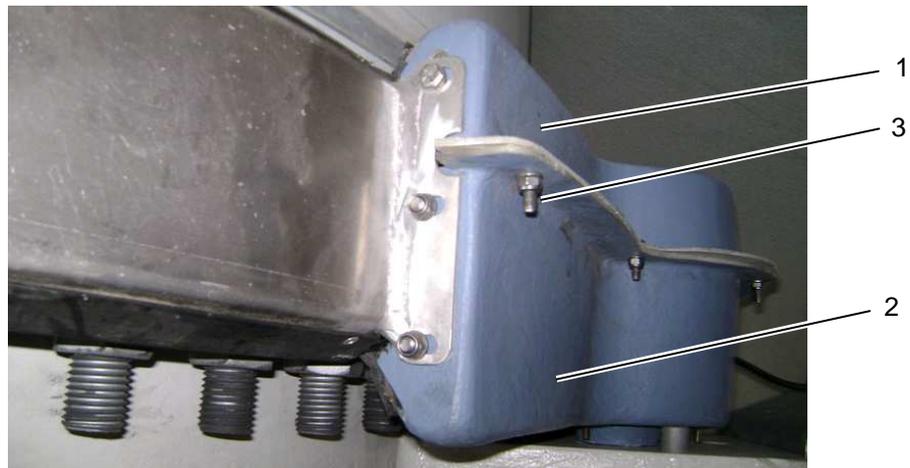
1 Gearing cover of the blade bearing
